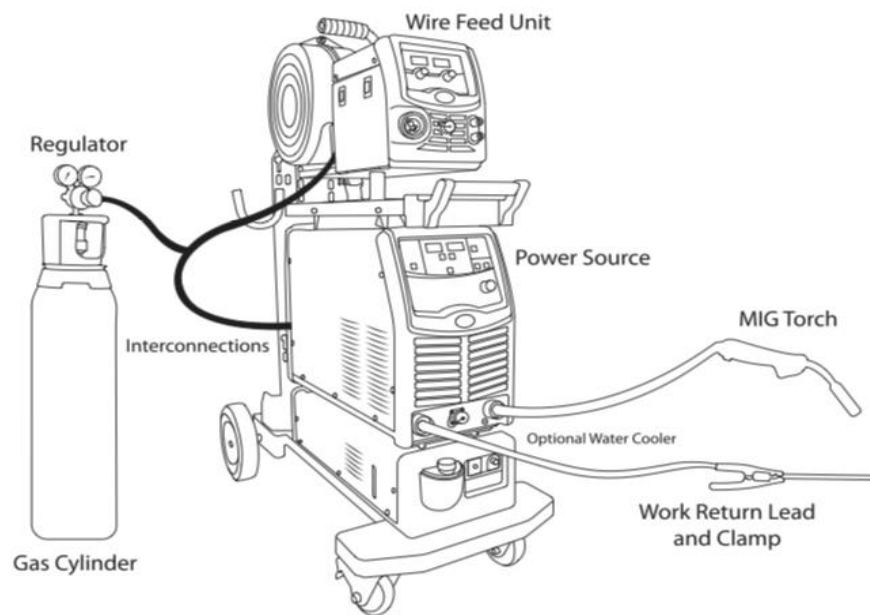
The MIG/MAG welding principle [52].
